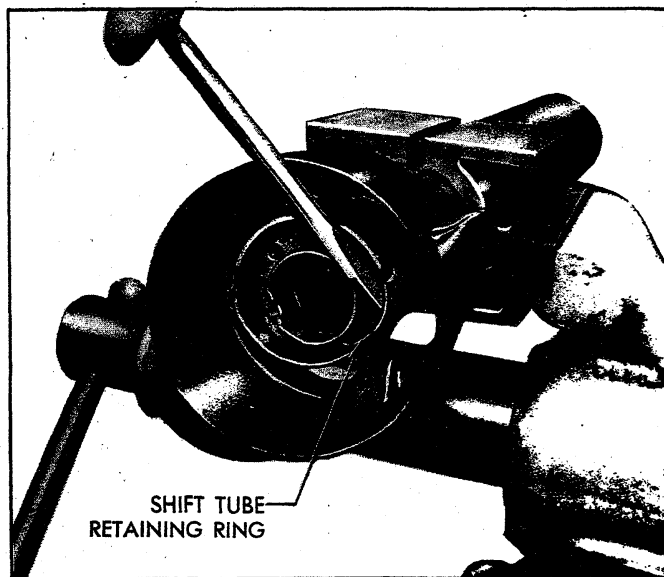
Shift Tube Retaining Ring and Lower Bushing
